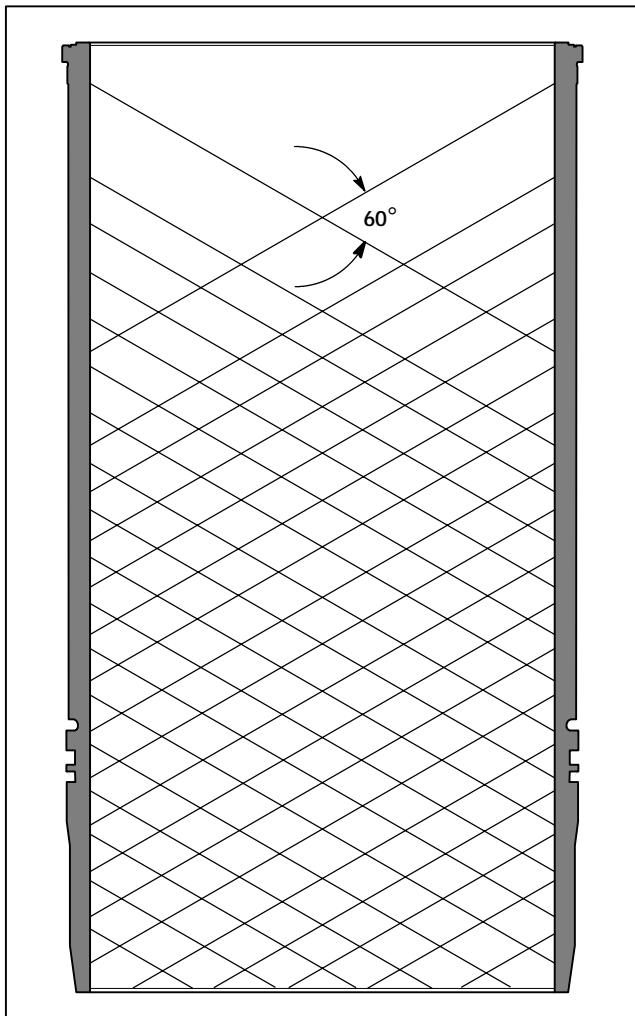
Cylinder Sleeve Deglazing Cross Hatch Pattern
